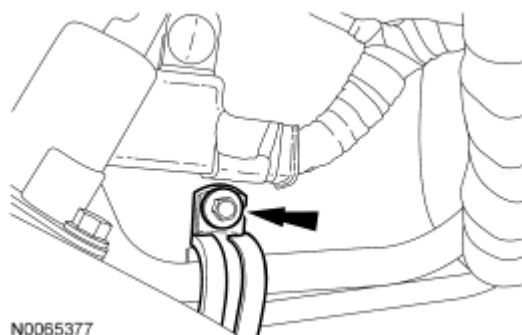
Identifying A/C Tube Retaining Clamp Bolt
